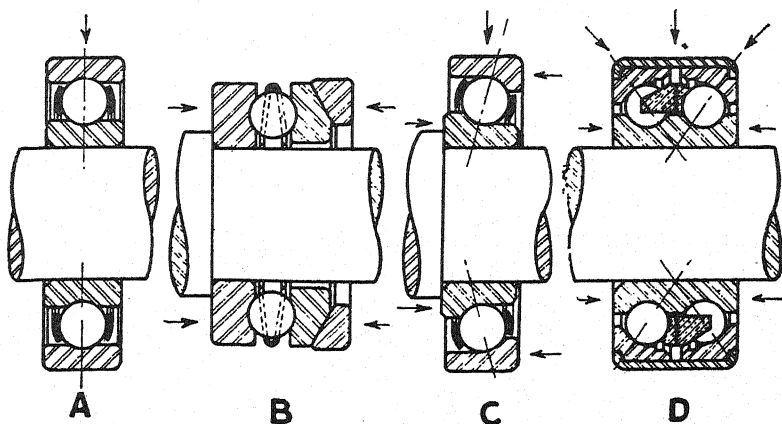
Loads on bearings. A—Radial load. B—Thrust load. C and D—Combined radial and thrust loads.
